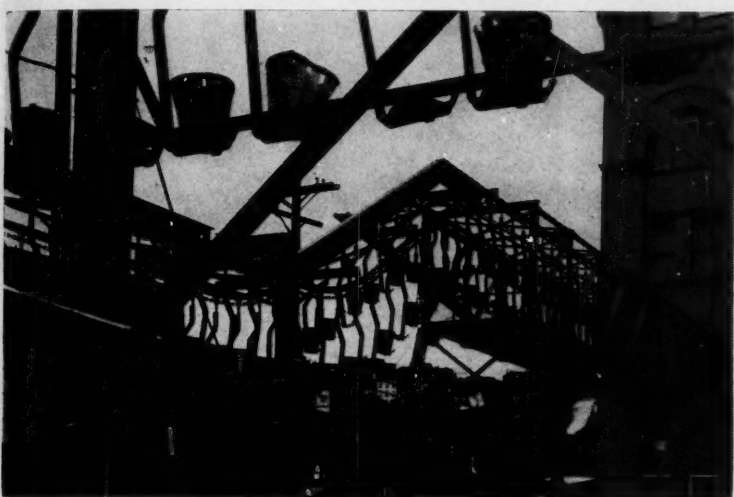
Showing "west" conveyor crossing street over trestle into manufacturer's building. It dips to processing floor and extends for 300 ft. unloading point.
